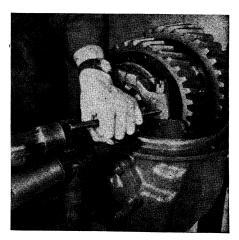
Marking differential bearing cap and carrier leg to identify for proper reassembly
